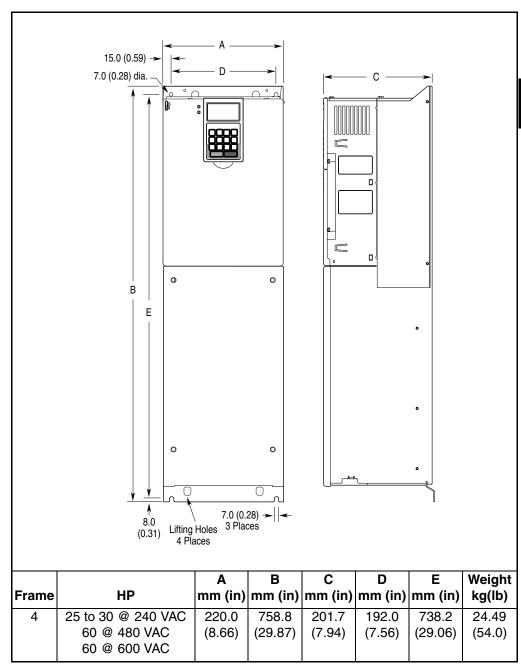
GV6000 Drive Dimensions Frame 4
